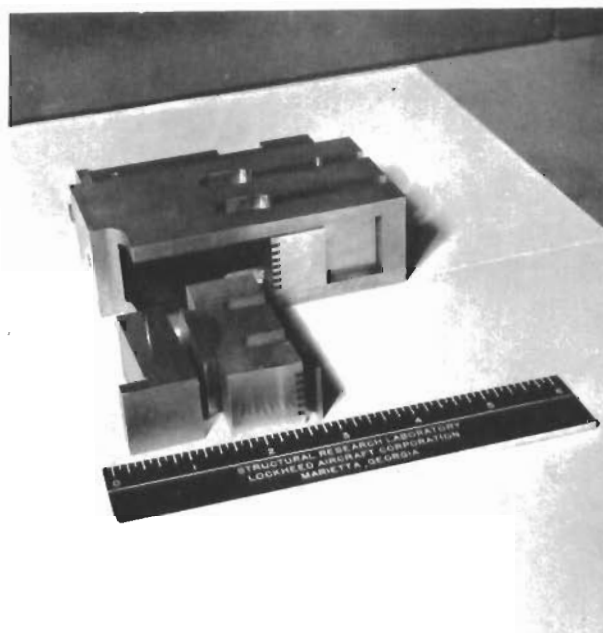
COMPRESSIVE TEST FIXTURE COMPONENTS
